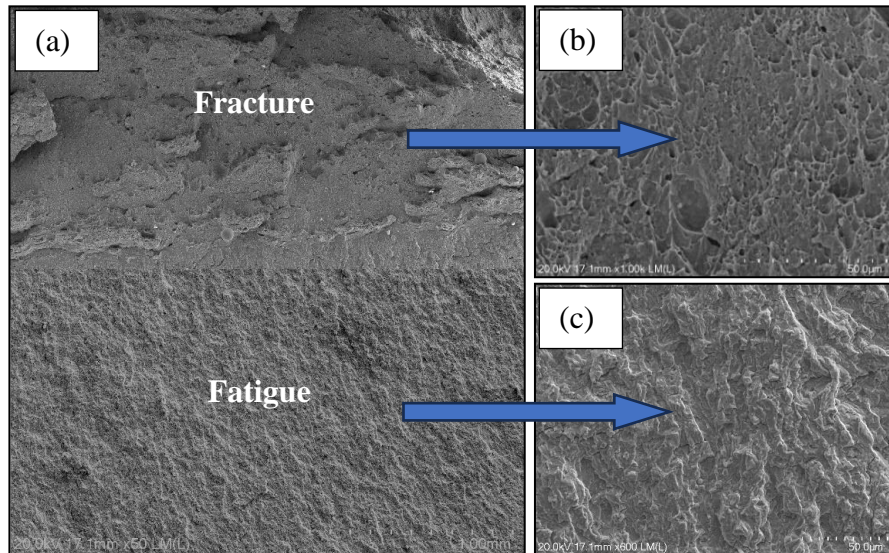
SEM image shows (a) the complete failure surface, (b) the fracture surface and (c) the fatigue surface of specimen FT-7.
